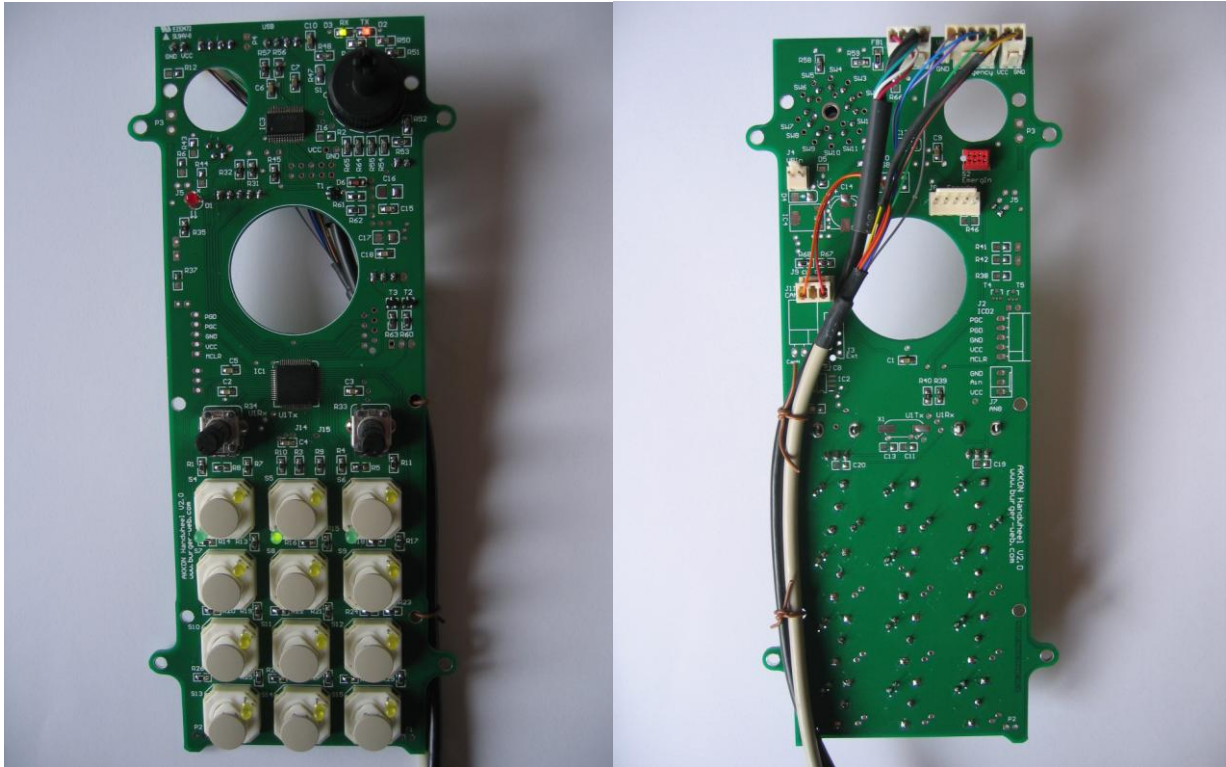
Front and top side of fully equipped AKKON Handwheel controller board
